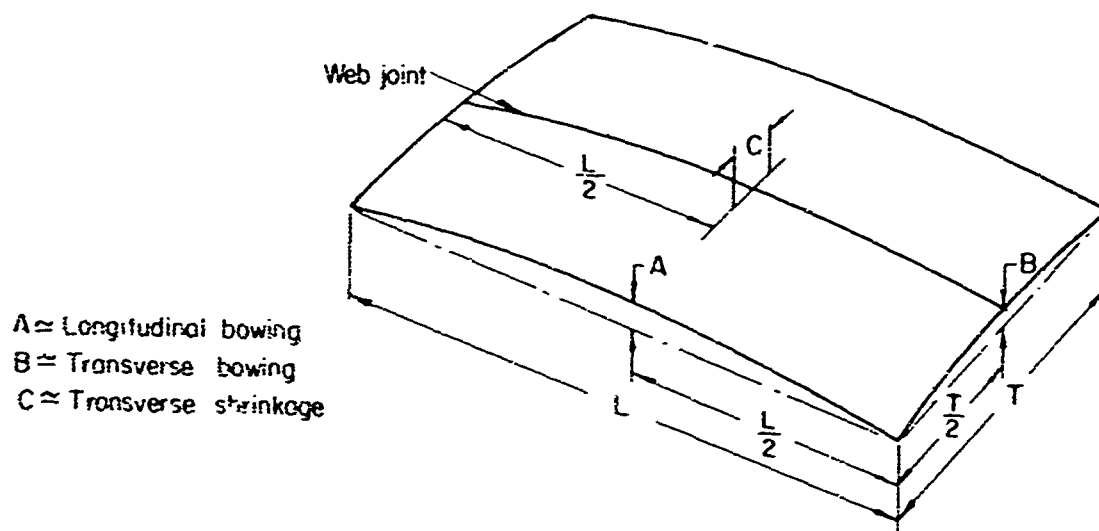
TYPES OF WELD-JOINT DISTORTION
